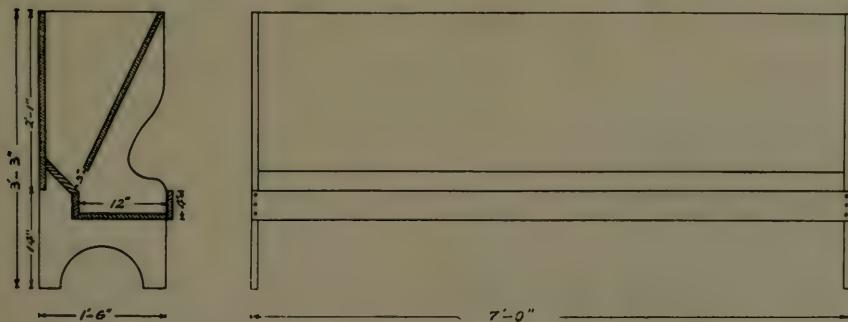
Feed trough used at the University of Wisconsin, in which hay is fed to young lambs, and both hay and grain to older sheep.
